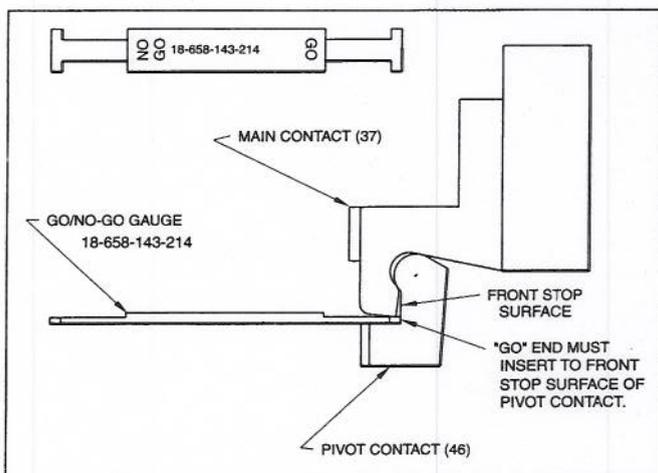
Use of the GO/NO-GO Gauge to Check Main Contact Make (Compression)
